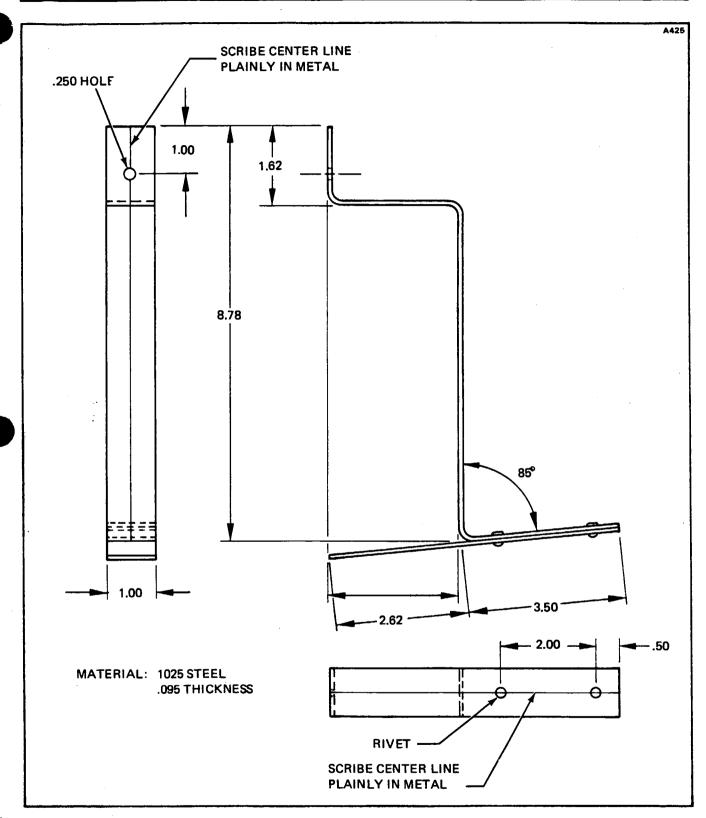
Fabricated Tool, Rudder Rigging (PA-23-250 [six place] "F" Only)
